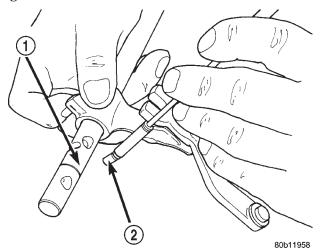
Remove Interlock Pin From Reverse Shift Rail
